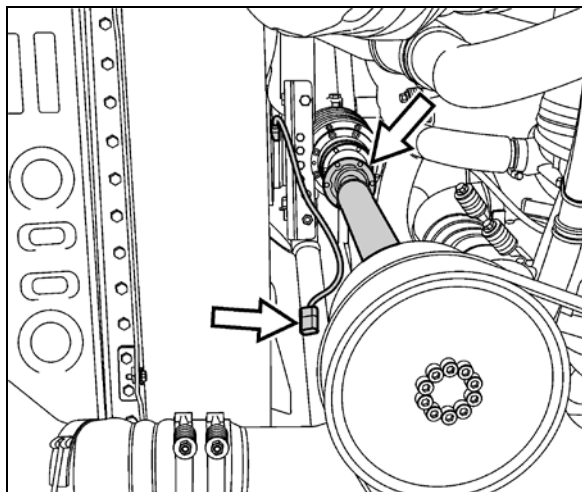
RADIATOR ASSEMBLY LOWER MOUNTING FASTENERS
